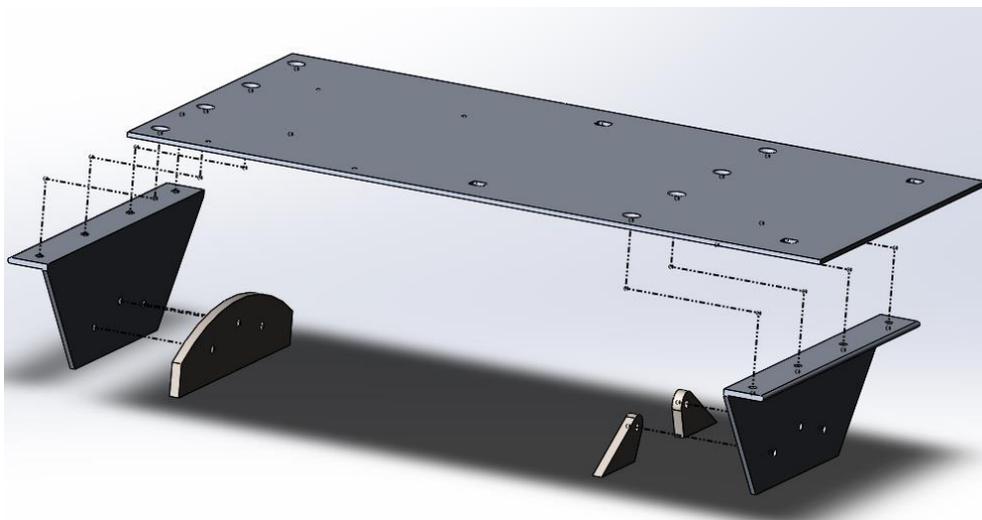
Final Design exploded view of mounting structure. Note, the small components to the bottom of the design are the representation of the mounting points on the motor.
